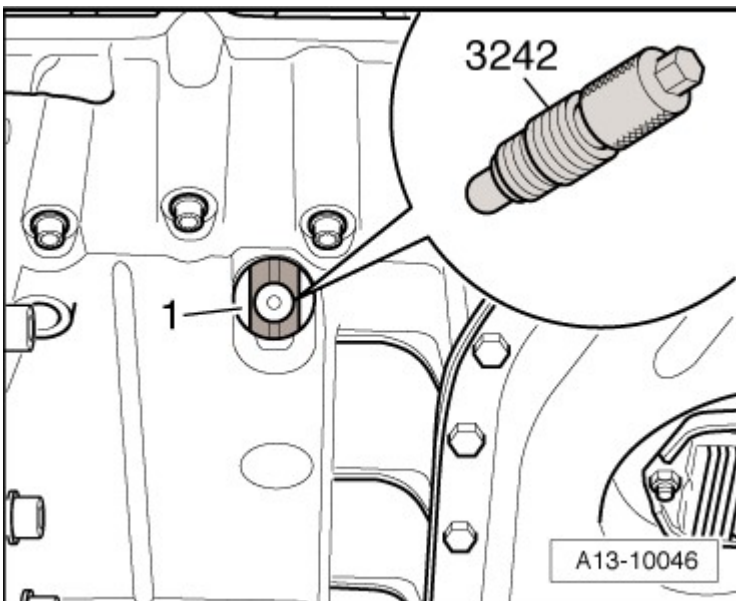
Identifying Crankshaft Holder 3242 In Bore
